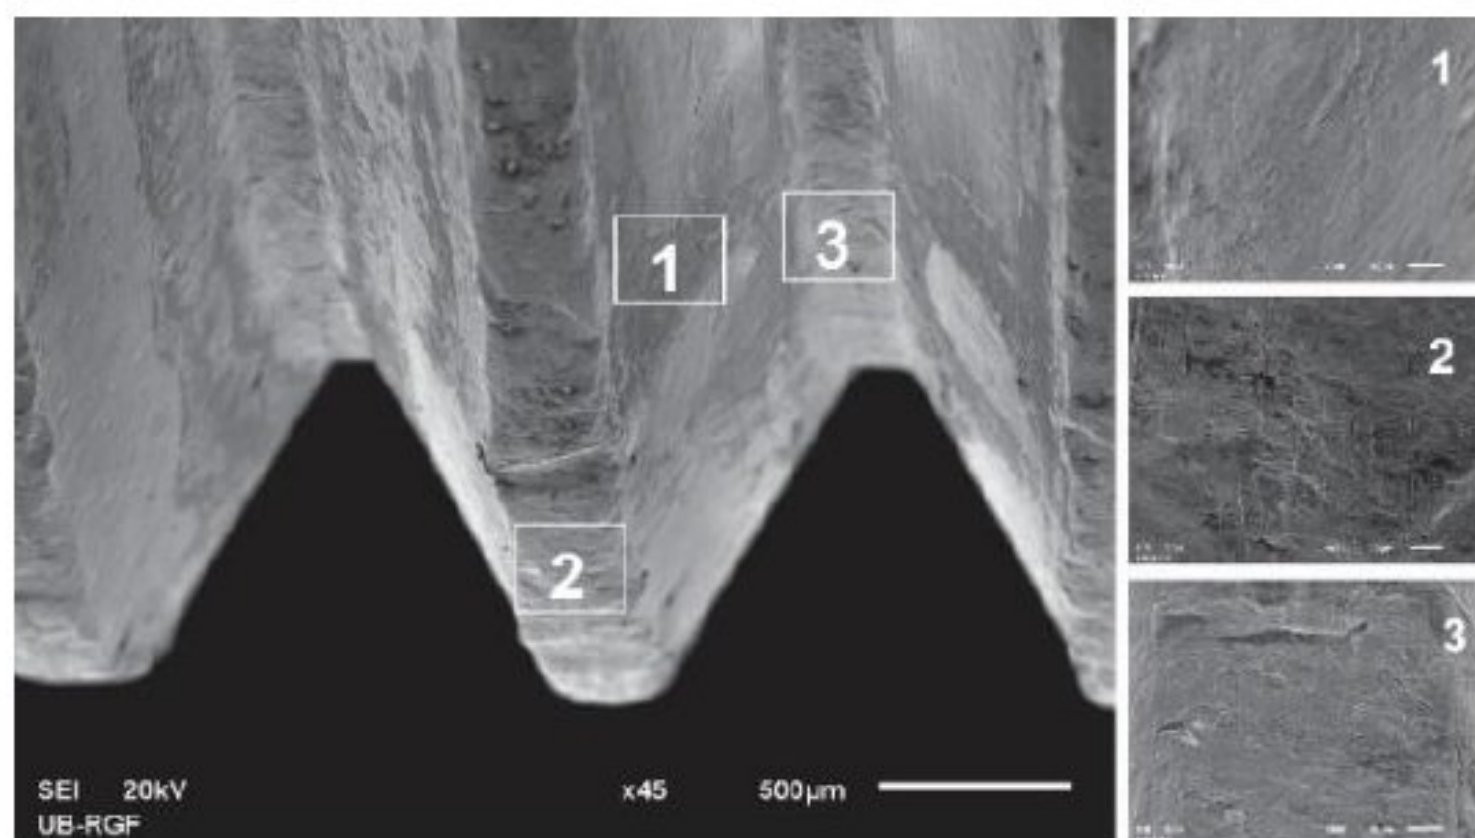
Electron microscope images: (right) – cut thread; (left) 1 – side, 2 – top, 3 – bottom.
